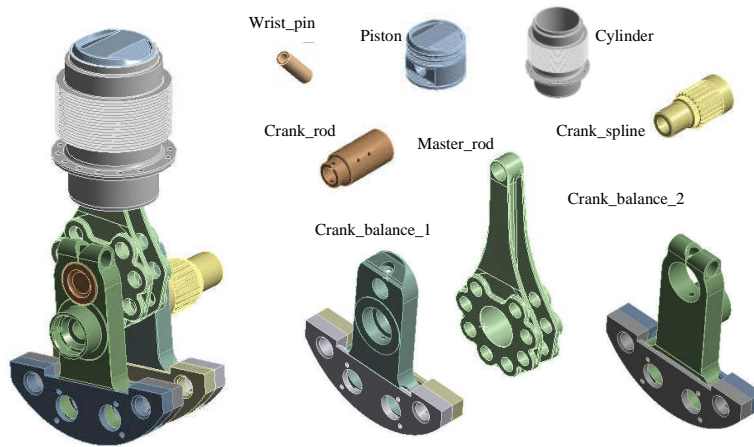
(a) Engine assembly, (b) disassembled parts.
